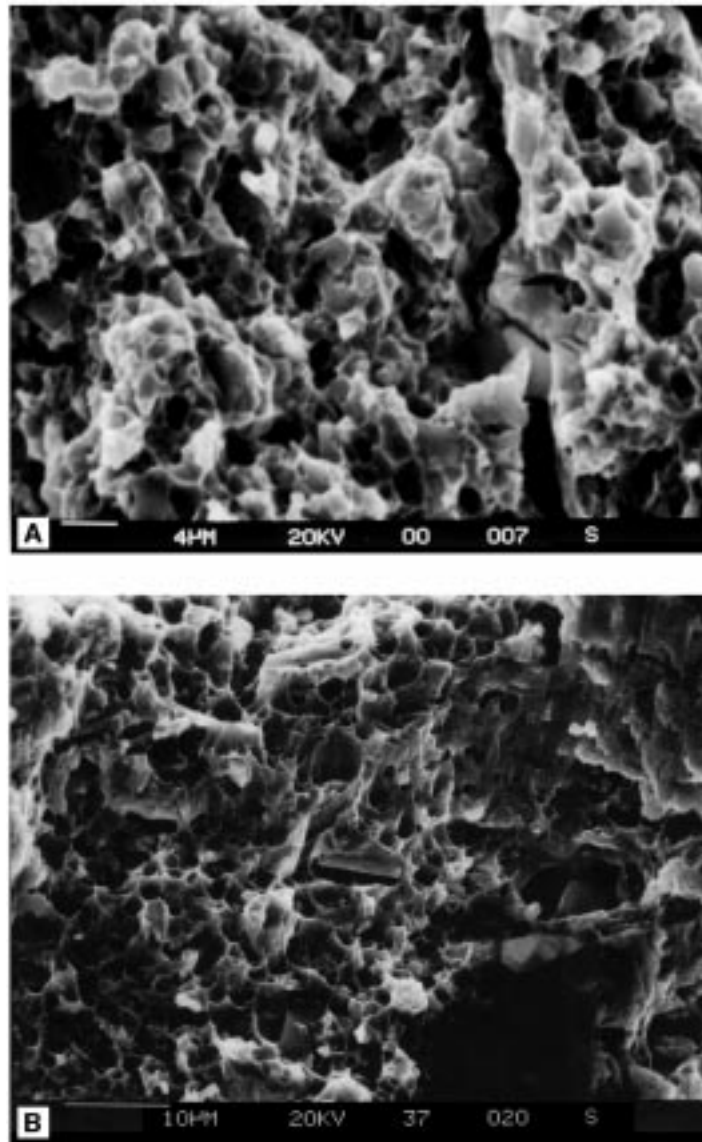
SEM fractographs of 2124+SiCw specimens tensile tested at (a) 300°F and (b) 500°F. The fracture surface in the matrix primarily consists of ductile dimples, with whisker ends in the bottom of some dimples. The dimples are drawn up more in (b) due to the higher test temperature. The large cracked particles on the fracture surfaces are constituent intermetallics. The whiskers do not break during the tensile test.
